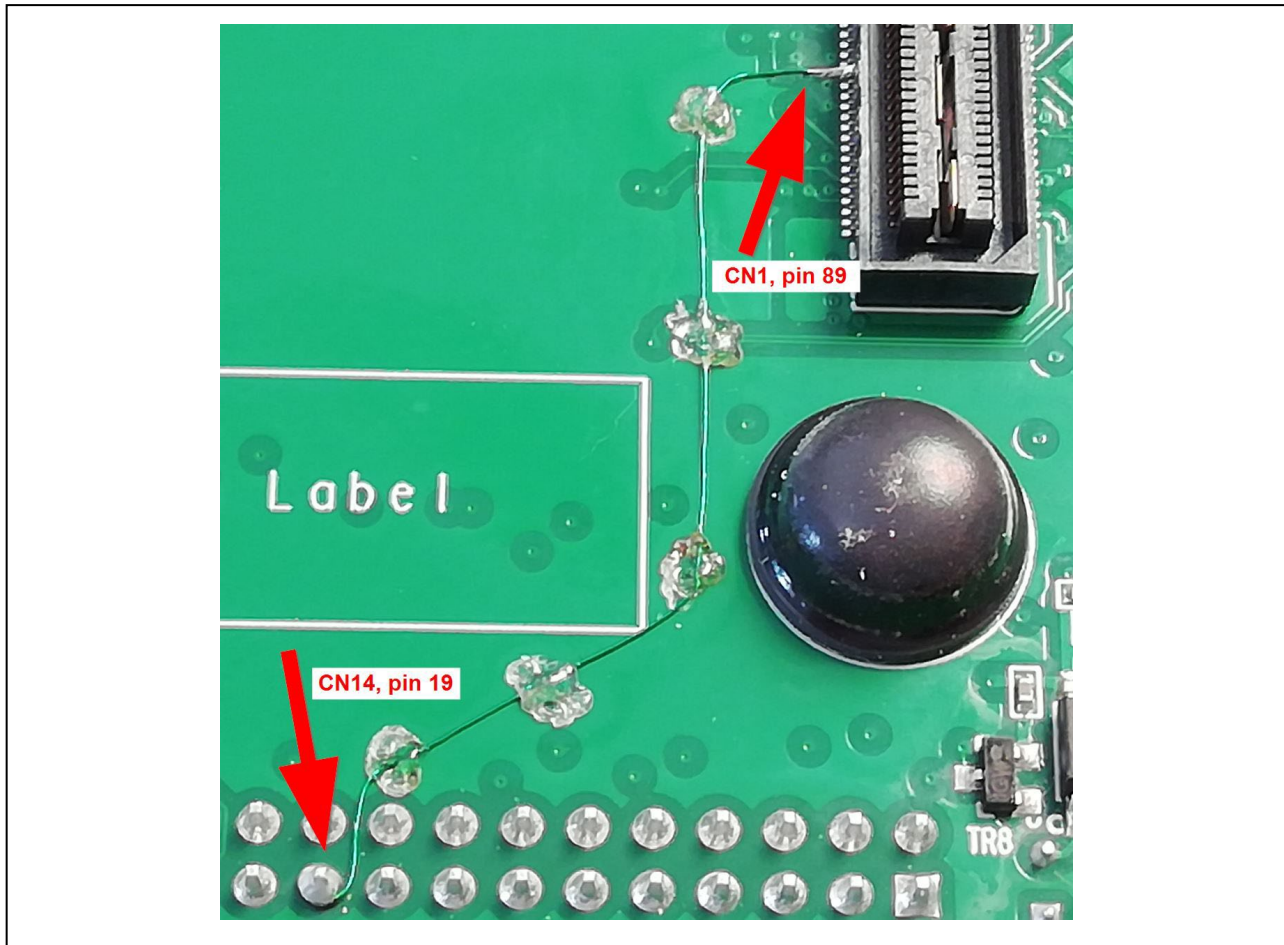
Bottom side rework: Add solder wire from connector CN14 pin 19 to connector CN1 pin 89
